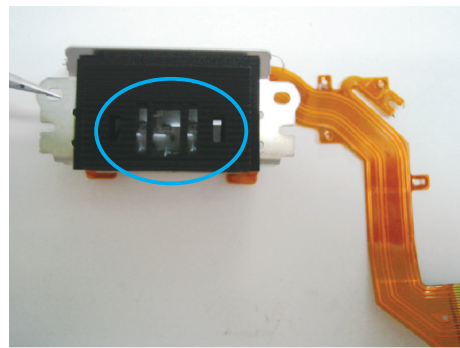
Auto Focus FPC Ass'y Assembly 2
